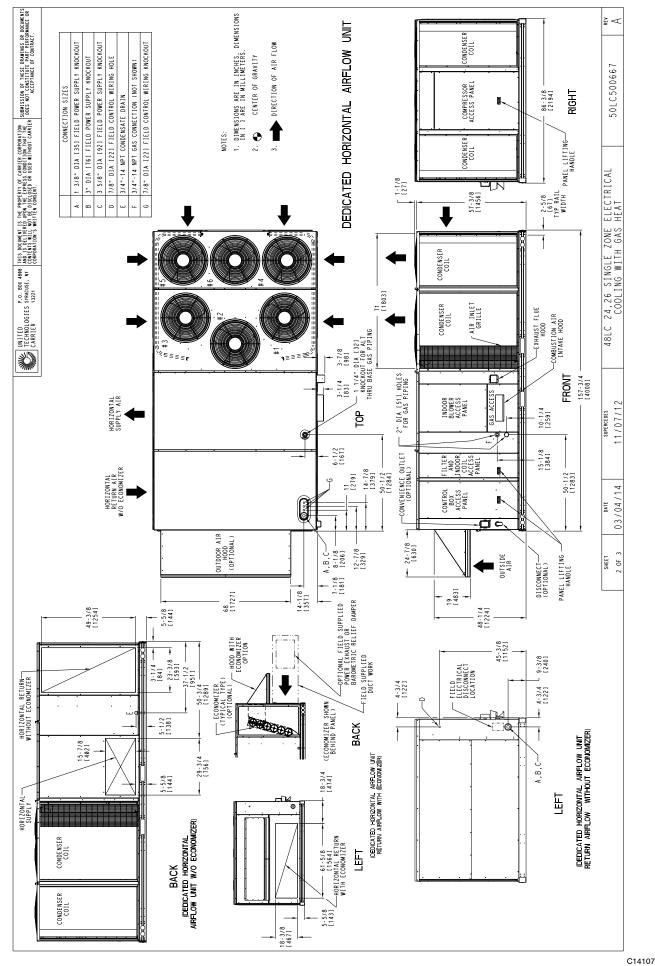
(cont.) - Unit Dimensional Drawing - 24 and 26 Size Units, Sheet 2 of 3
